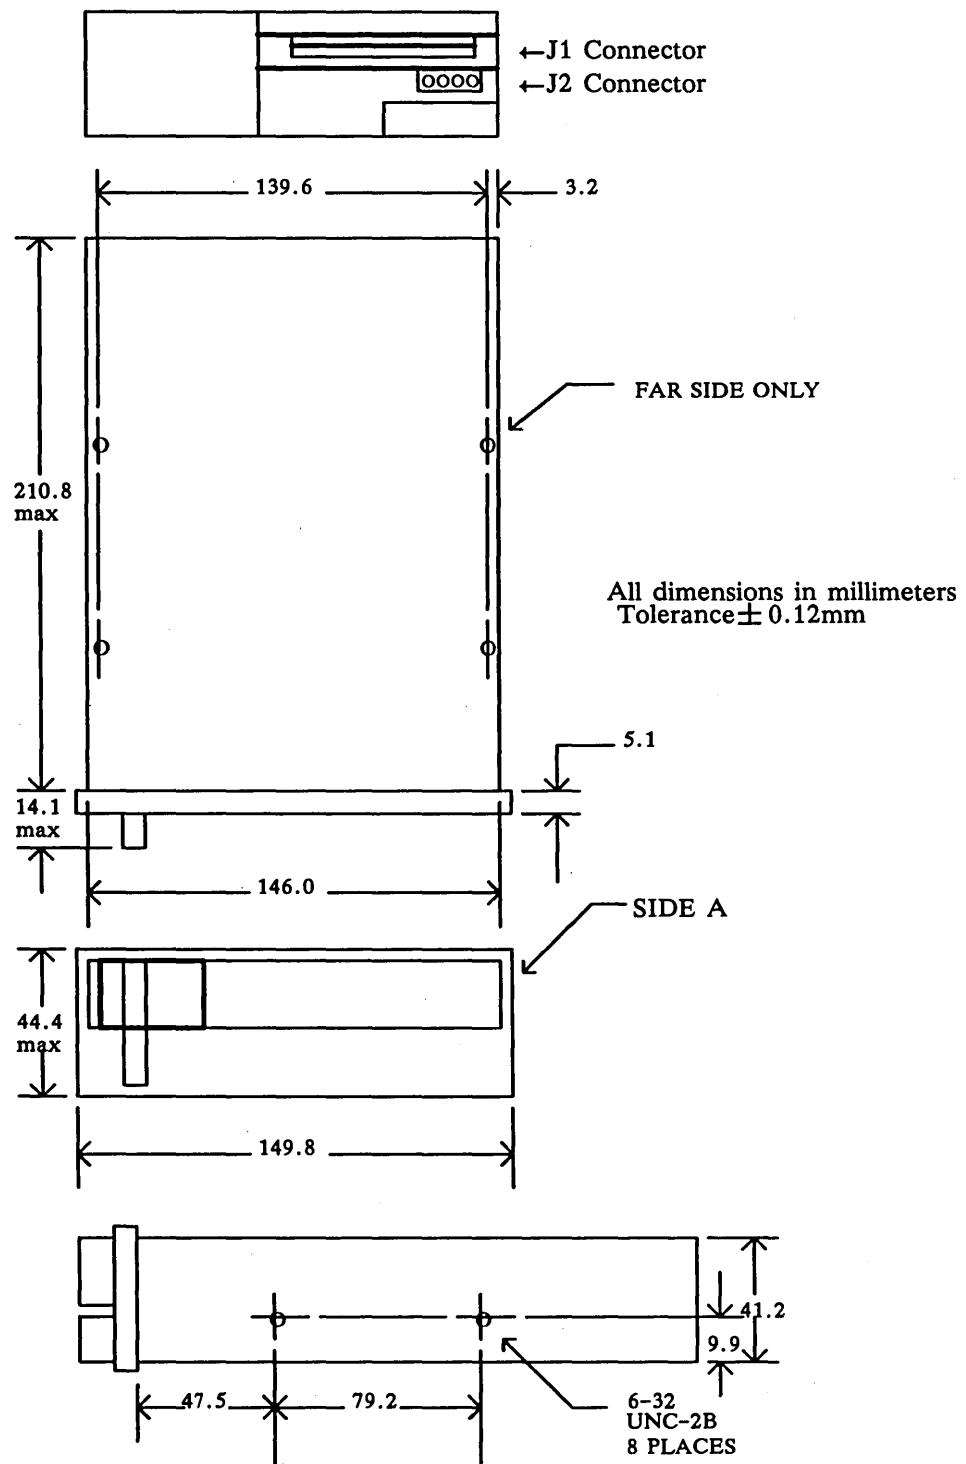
Tape Drive Exterior Dimensions and Mounting Holes
